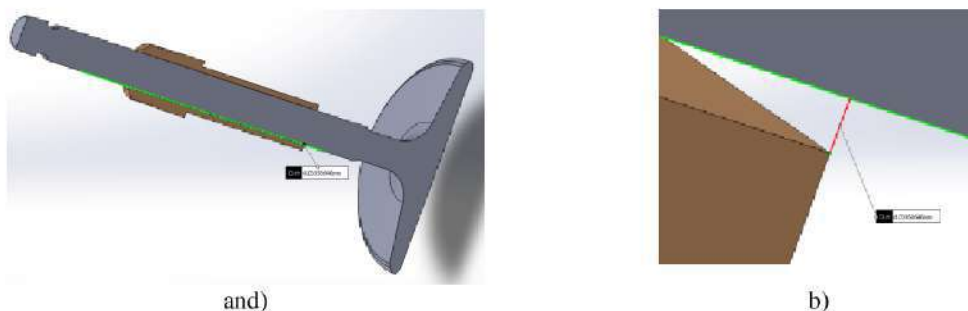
The gap between the valve stem and the guide: a) longitudinal section; b) enlarged view of the Solid model
